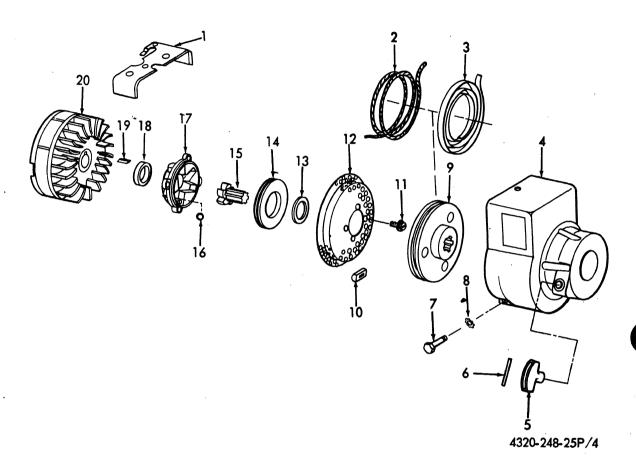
REWINDSTARTER, FLYWHEEL AND SHROUD
